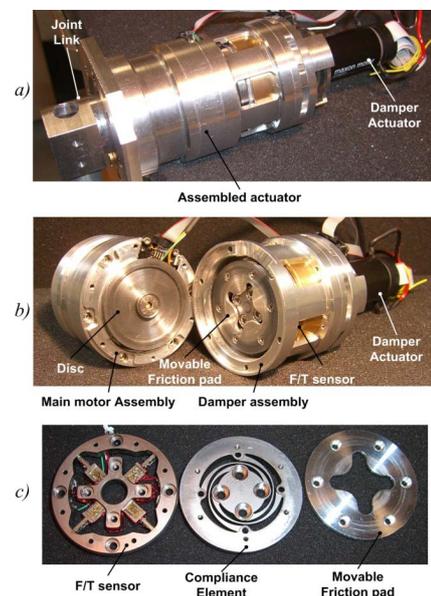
The developed variable damping actuator a) Complete assembly b) Main motor and damper assemblies exposing the brake disk, c) The F/T sensor, compliance element and movable friction pad.
